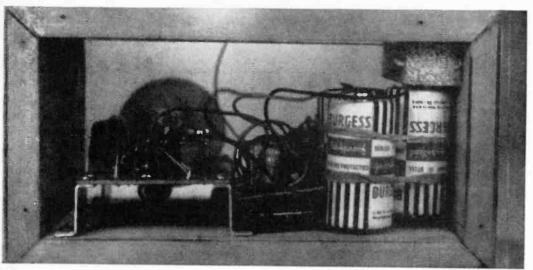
Rear view. Cabinet is assembled to base, Panel not installed.
